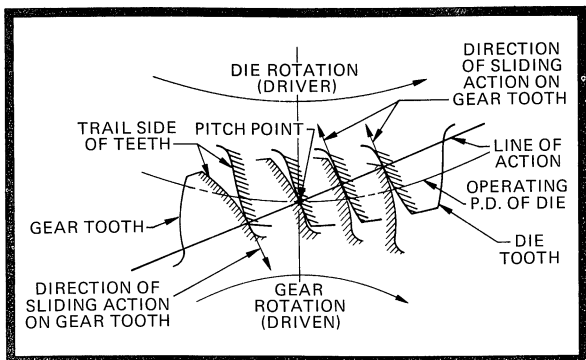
Contact action between the tooth of a workpiece and the trail side of a rolling die tooth.
